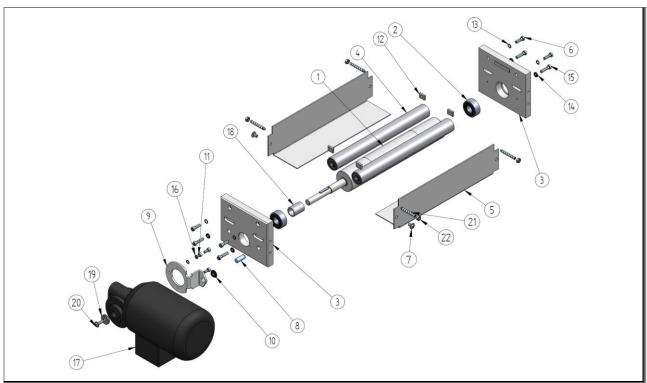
Parts list: Central motor flange drive unit - drive unit/motor unit - position of drive unit 56 - ZZ.900.0064
